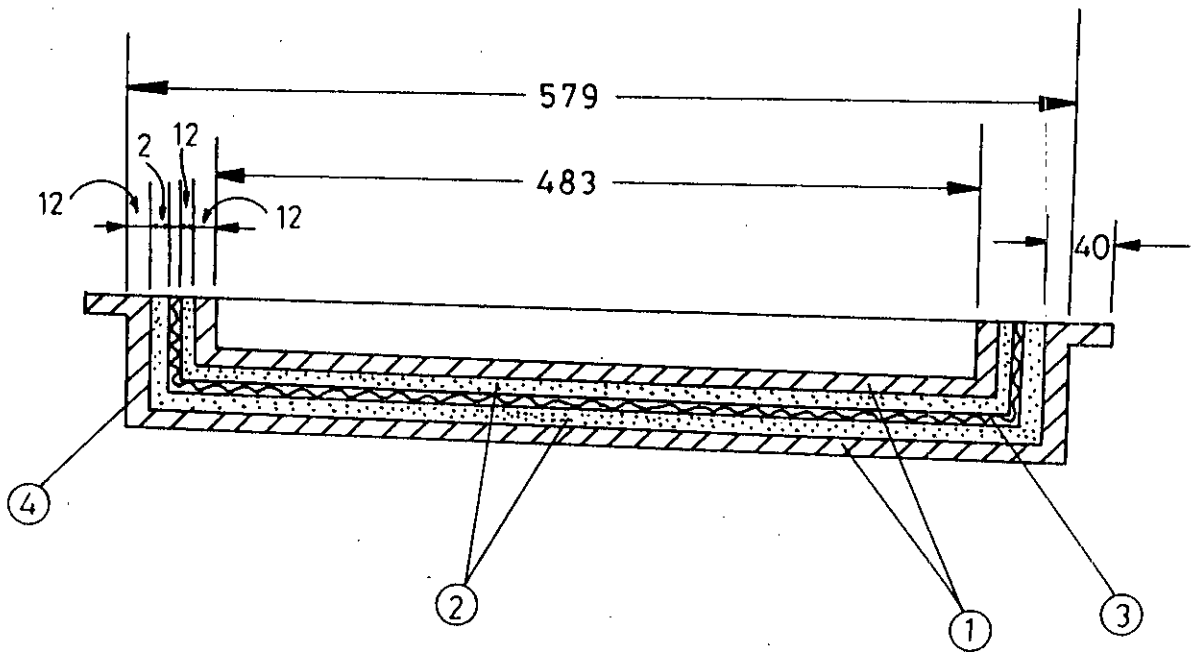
DETAILS OF HOT PLATE ASSEMBLY.
